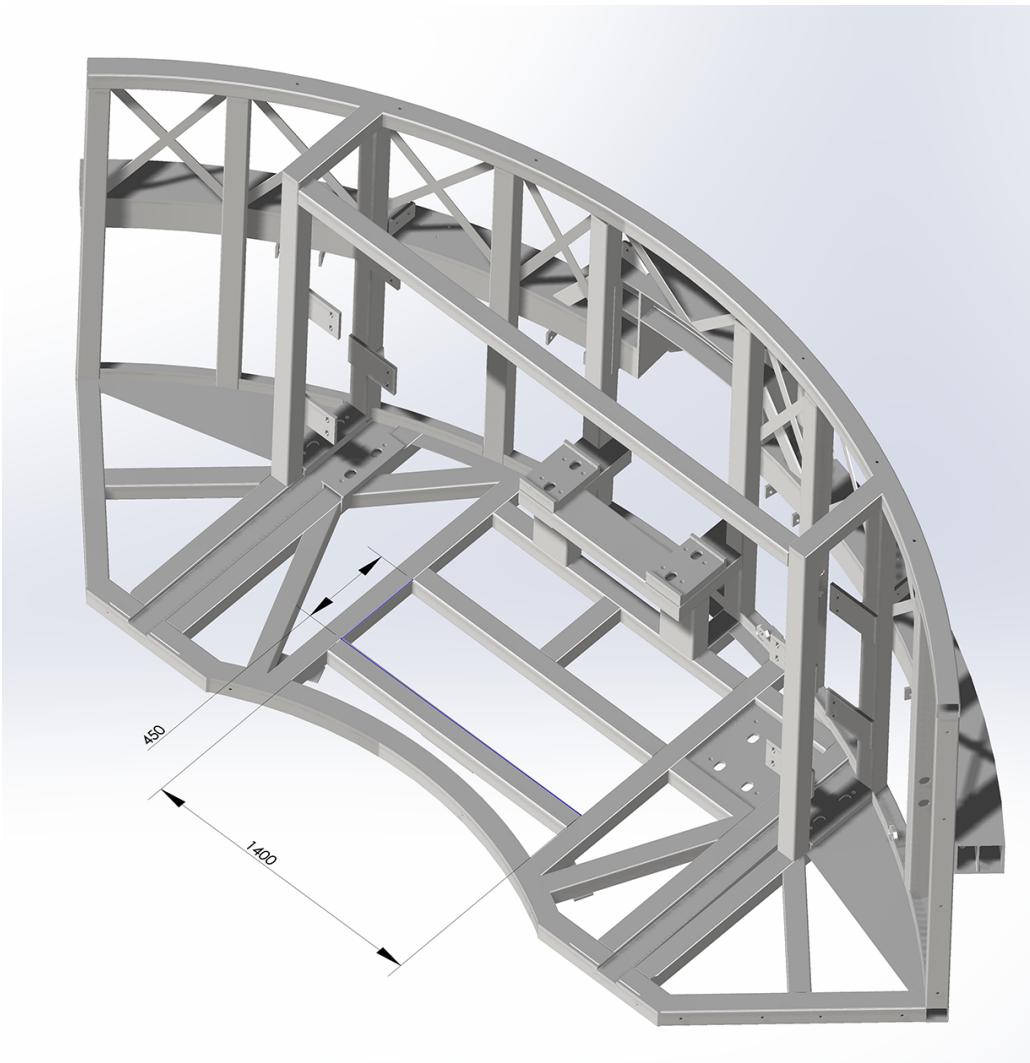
Removable floor hatch on observation floor in EOS 1.8m telescope
